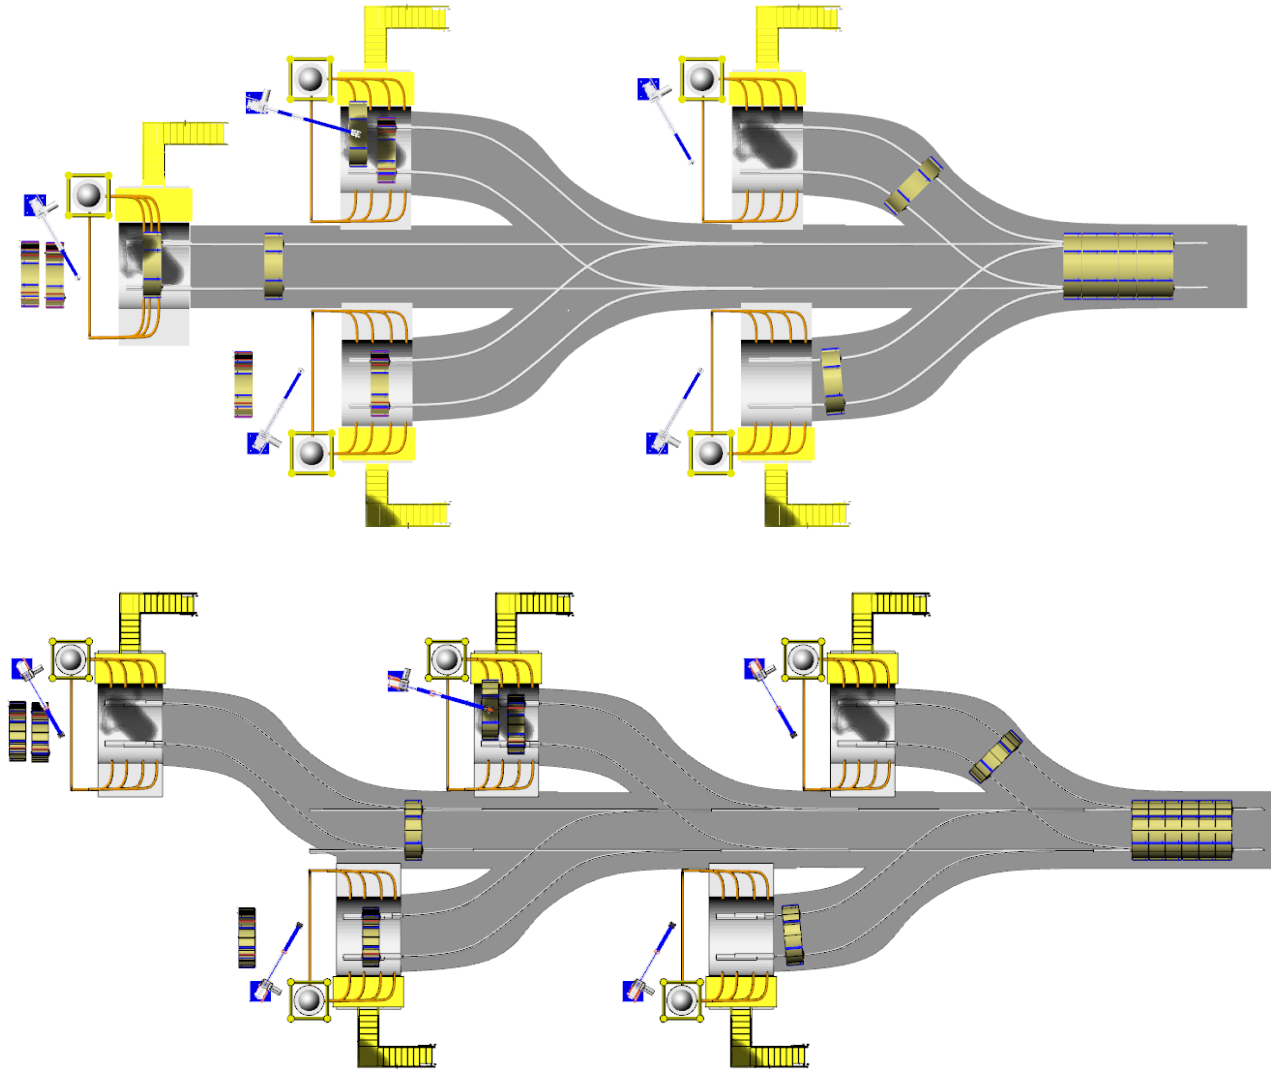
Top view of 2 different configurations for the assembly-line with 5 Stations.
